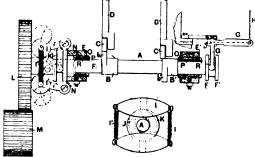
EXHAUST-VALVE CONTROL GEAR.
